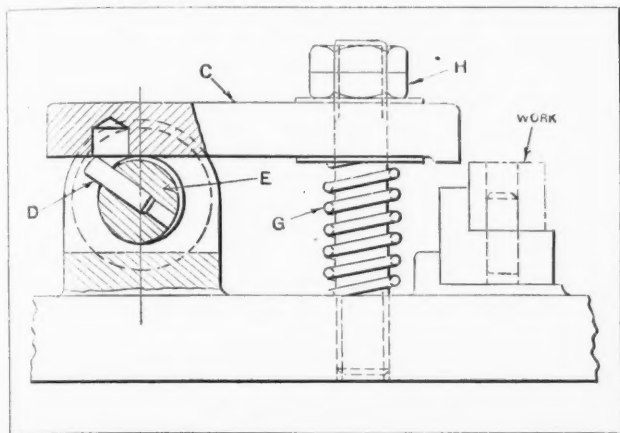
Quick-acting Clamp in Open Position for Removal of Work
